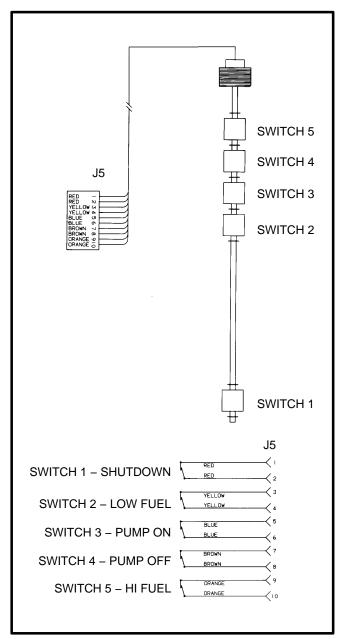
FLOAT SWITCH ASSEMBLY
